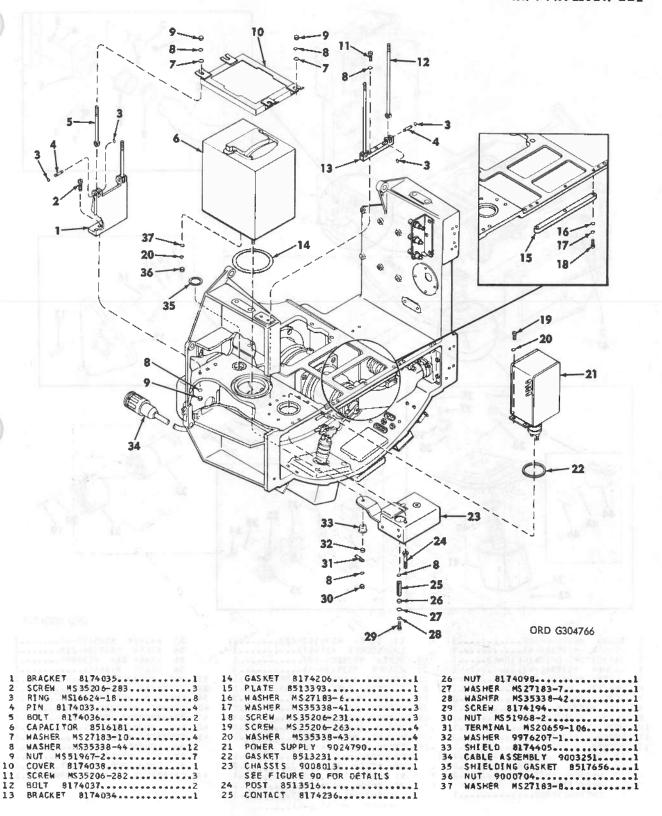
MODULATOR /8172445/-PARTIAL EXPLODED VIEW
